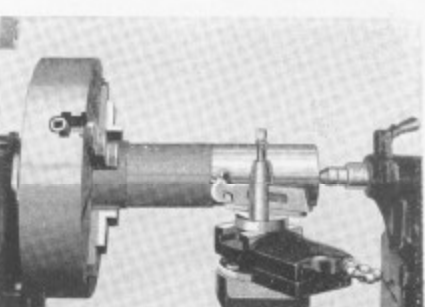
Finishing a Cast Iron Cylinder Sleeve for press fit in Cylinder Block.
